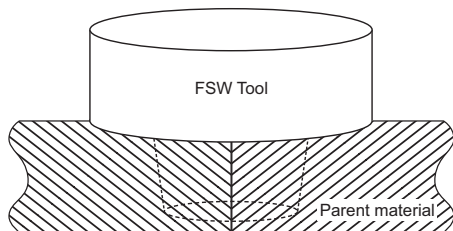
FSW butt weld as viewed down weld (welding into page)
